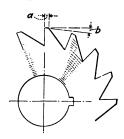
Shows clearance (b) on land (a) of saw tooth of milling cutter.
